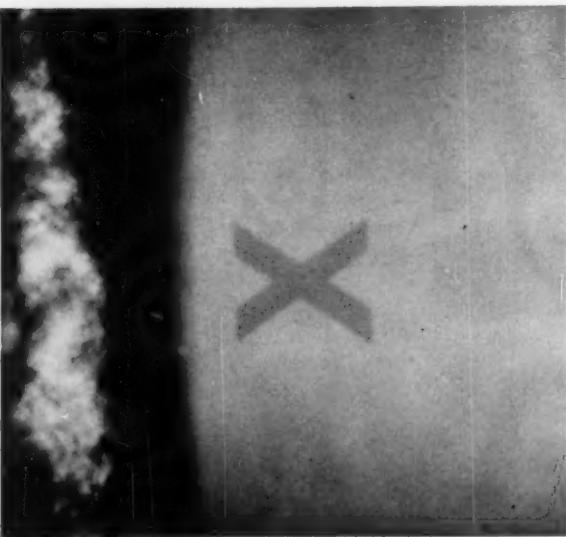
Radiograph of riser and upper part of casting described in text. Shrinkage is confined to the riser section at the top of photo. Casting is sound.
